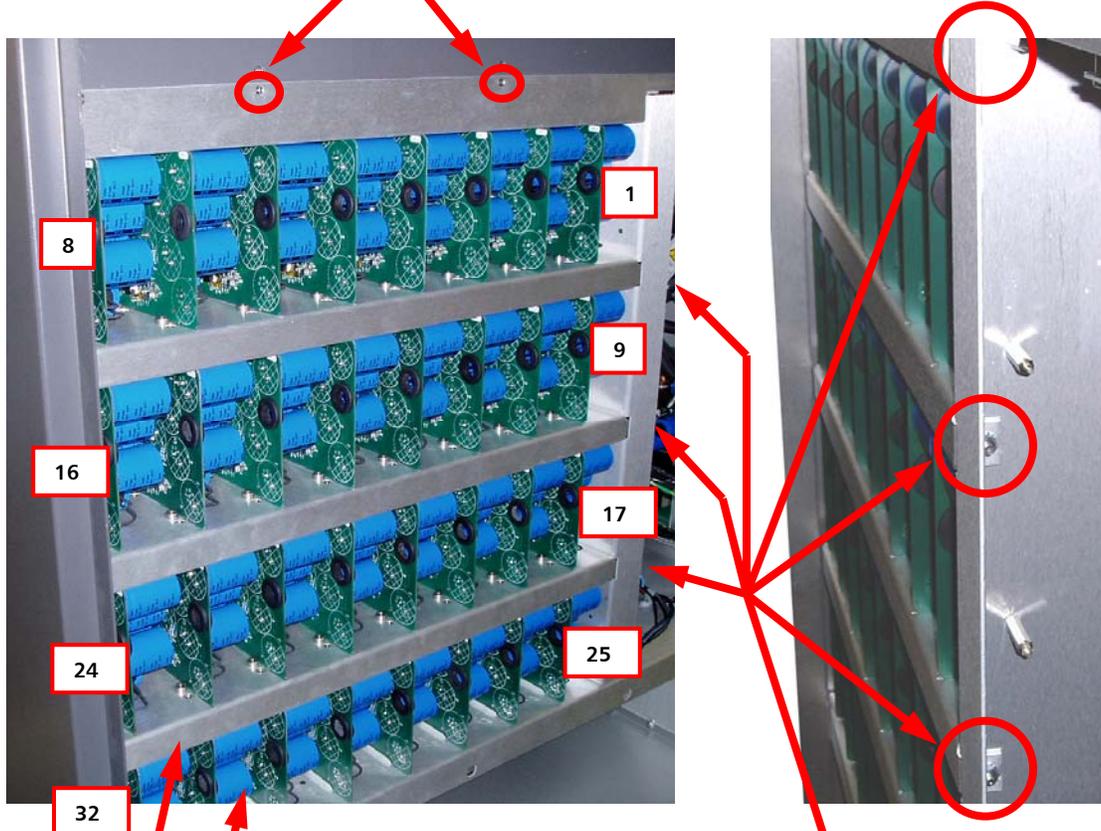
Install Power Supply Modules (4MX 50 shown in illustration)
